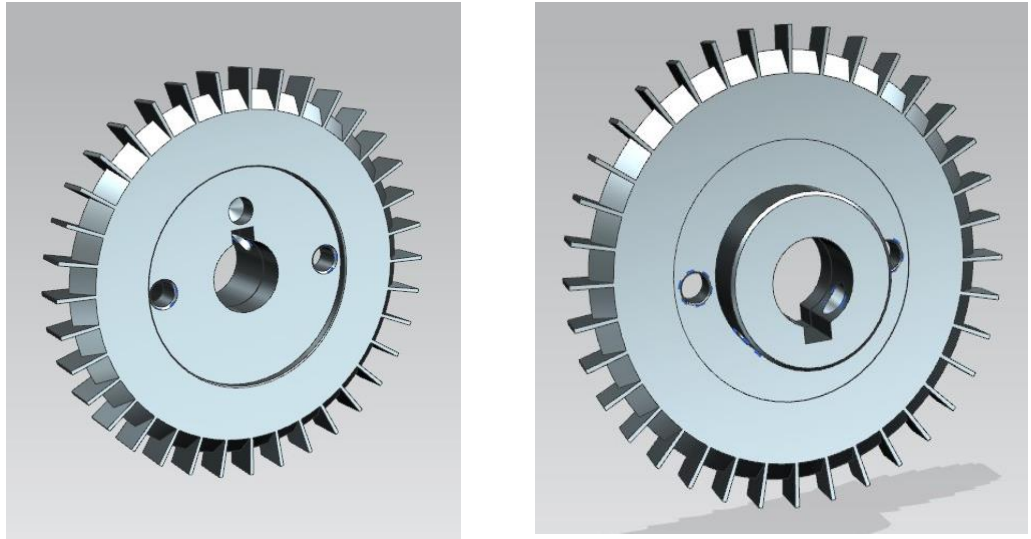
The three-dimensional model of impeller system - MOMB-DAF-2
